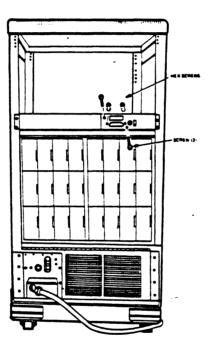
CABINET SLU ASSEMBLY REMOVAL
